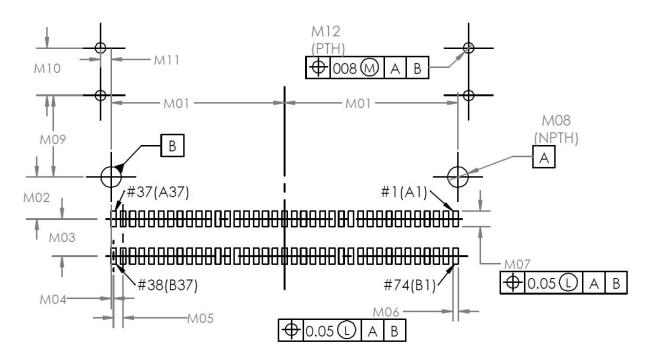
8X RIGHT ANGLE RECEPTACLE CONNECTOR FOOTPRINT
